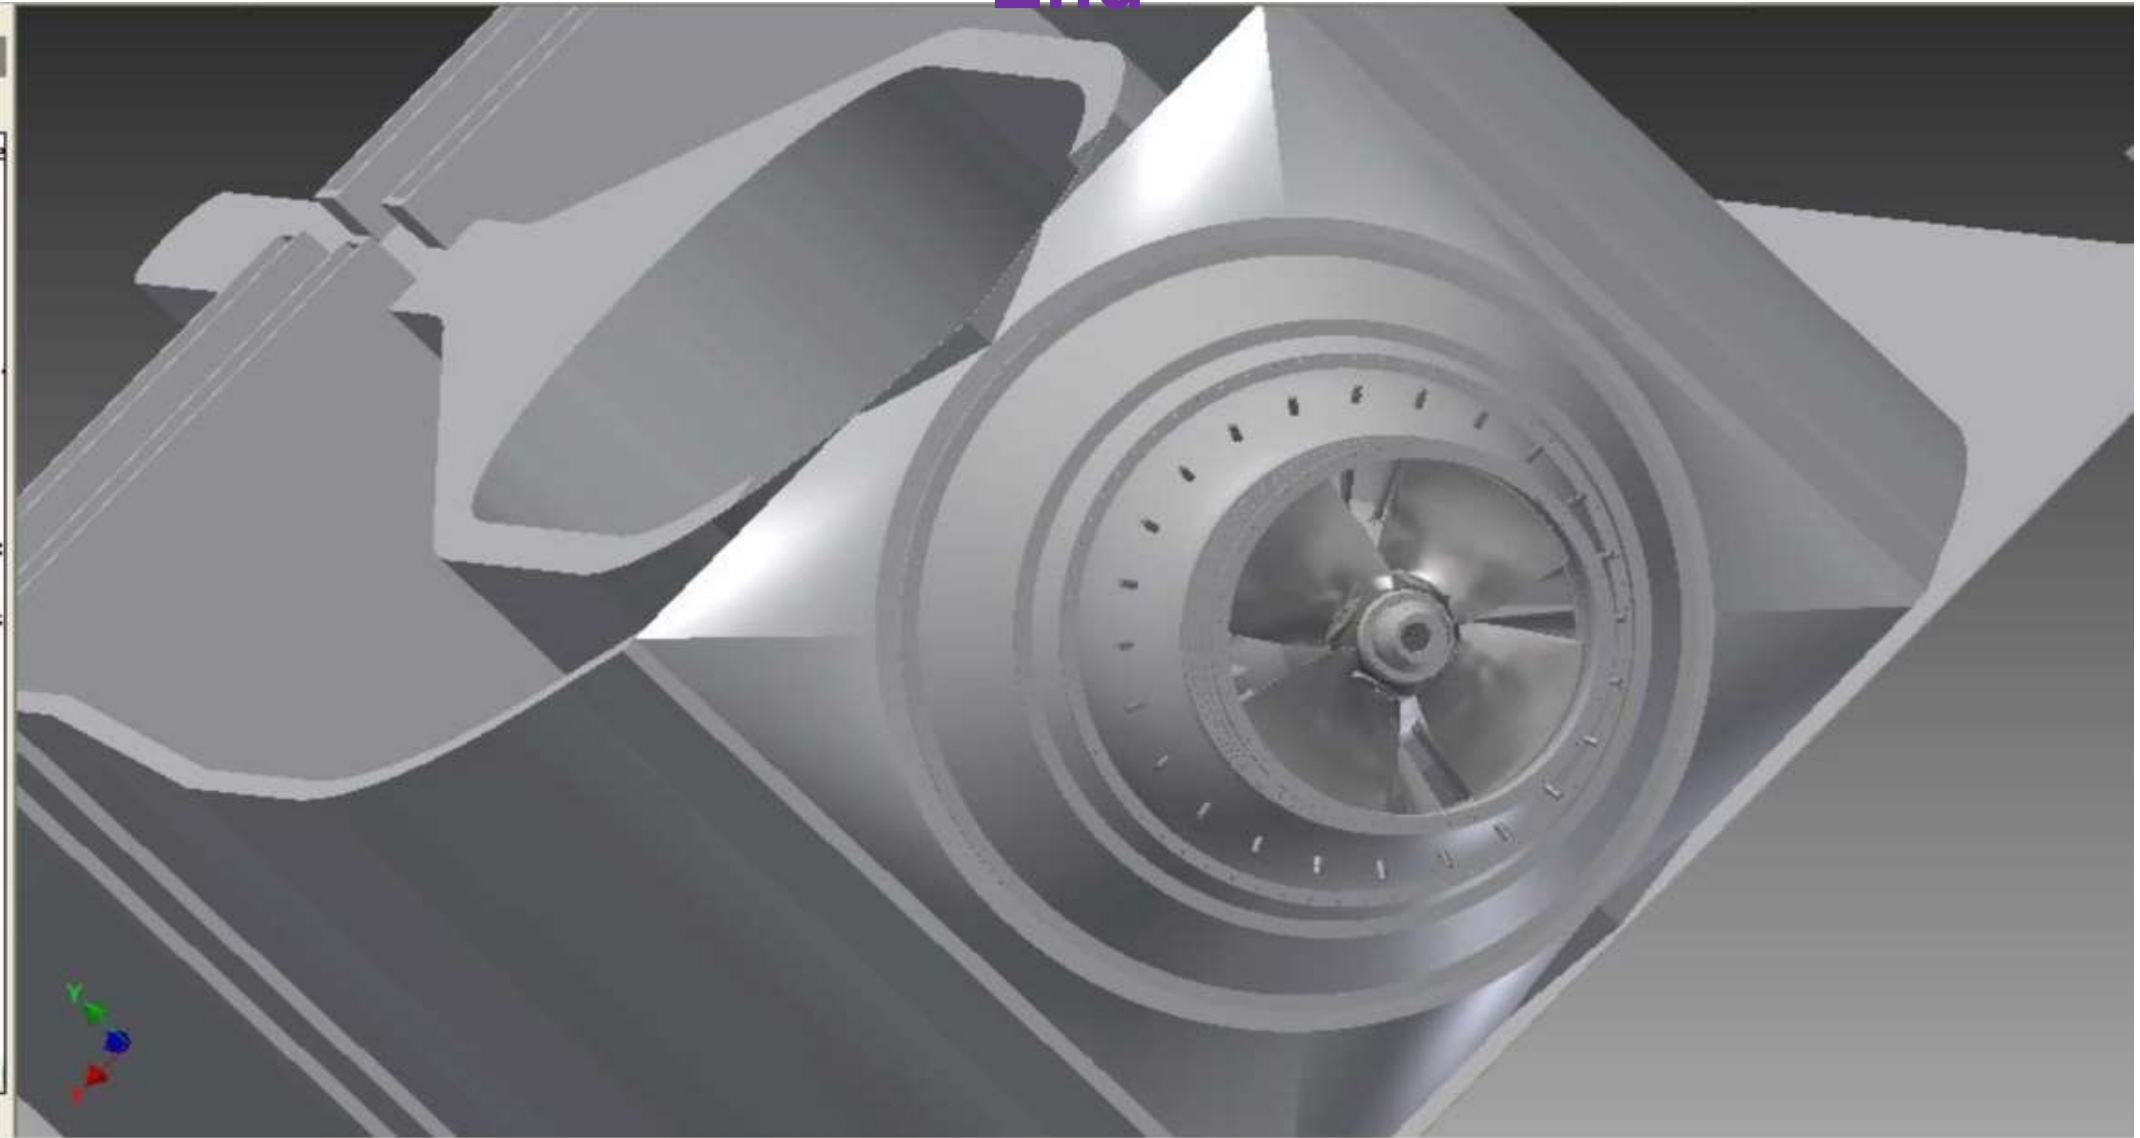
Pit Type HFK Front View at Runner Chamber End
